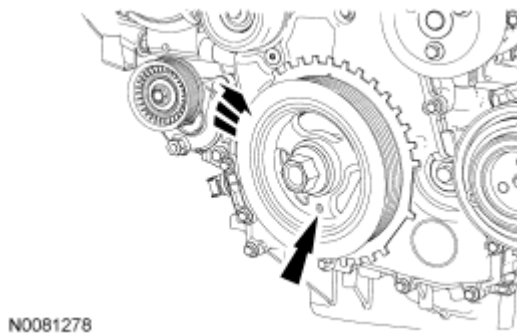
Identifying Hole In Crankshaft Pulley In 6 O'Clock Position
